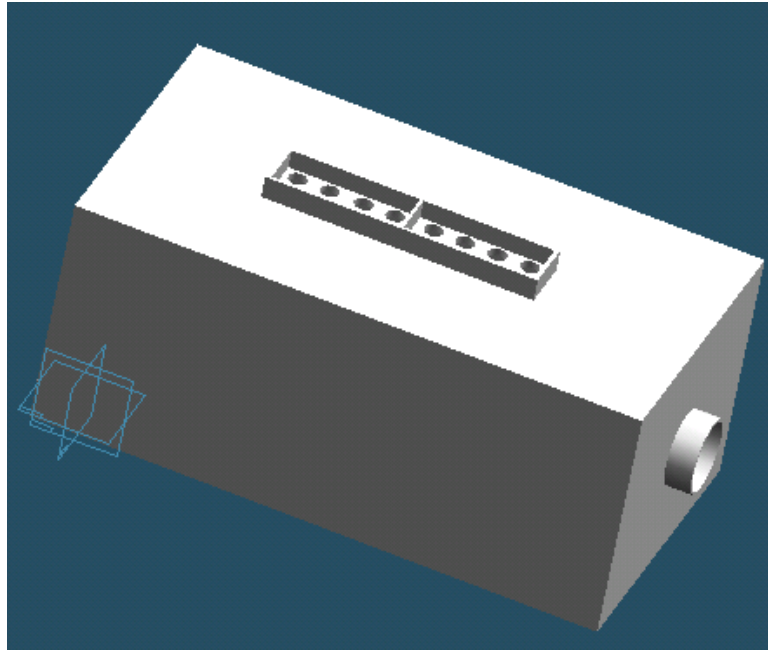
Isometric view of bottom rectangular tank (baffles inside not shown)
